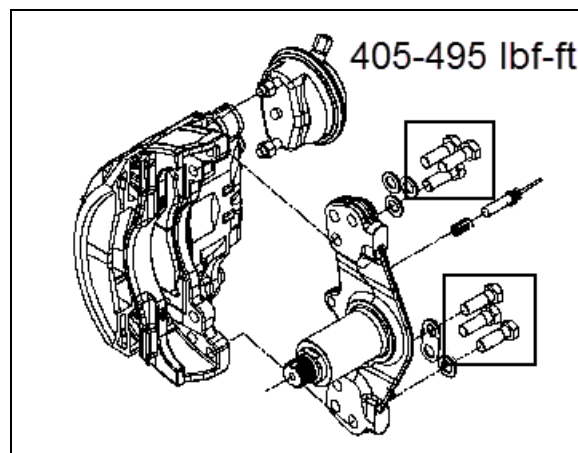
CALIPER CARRIER MOUNTING BOLTS TORQUE SPECIFICATION - TAG AXLE
